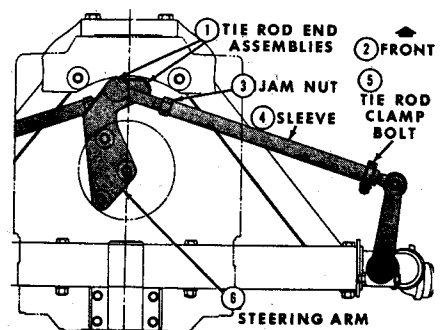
View showing position of all purpose type center steering arm for checking toe-in. Note that center arm (6) and tie rod inner ends are different than those used on row crop front end. View is from top.
